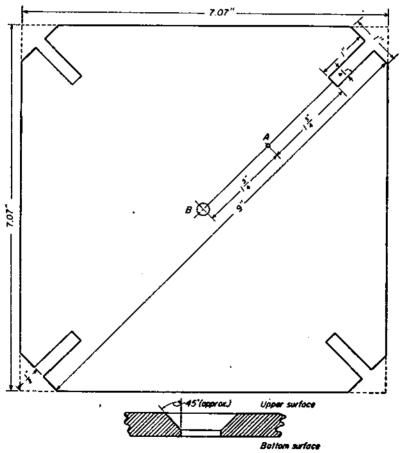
Master plate and enlarged cross section showing how holes A and B are to be beyeled.
